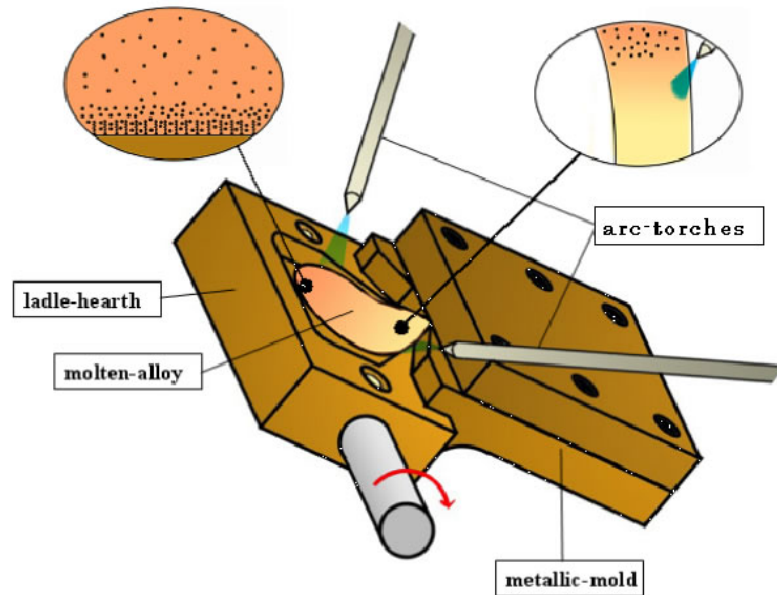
Sketch of the tilt casting system equipped with dual electric arc torches, used in this project. Courtesy of Yoshihiko Yokoyama[28].
